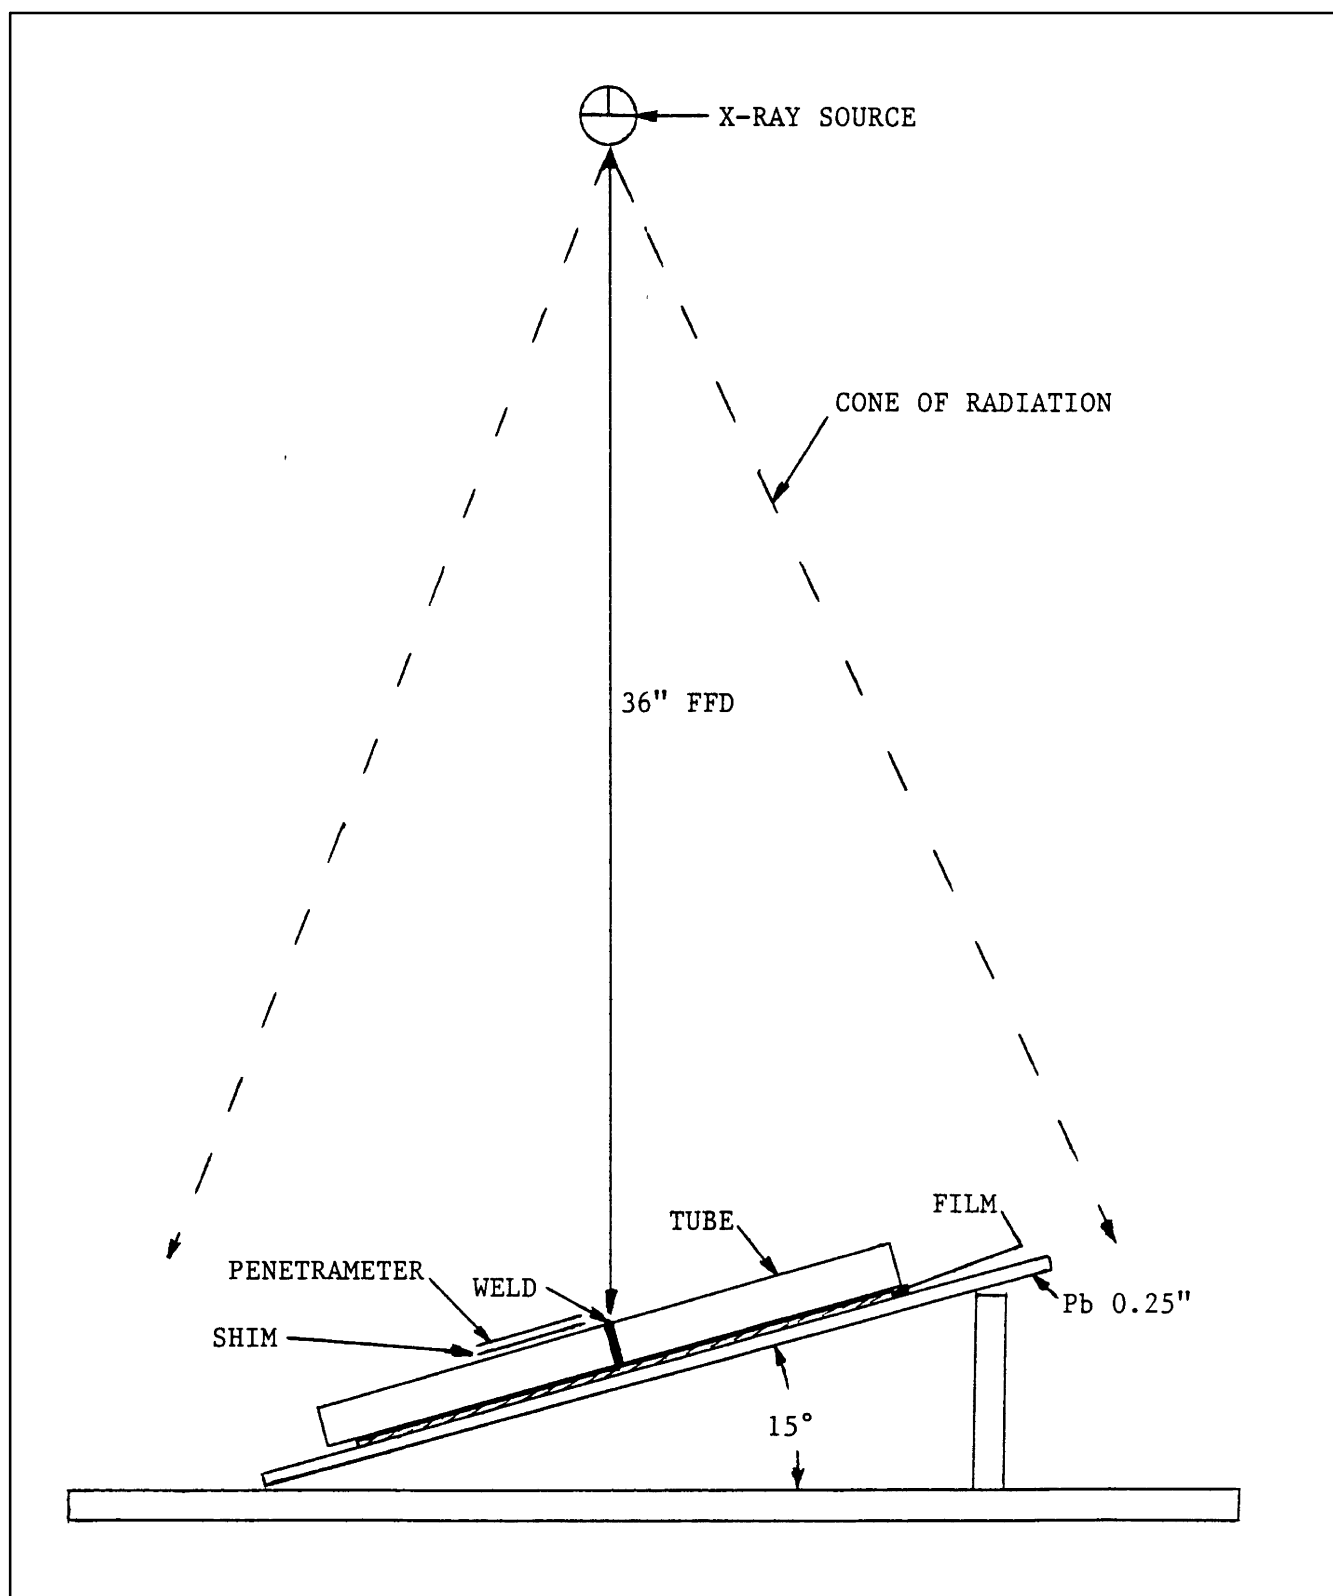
Exposure Setup - 1" tube (Sheet 1 of 2)
